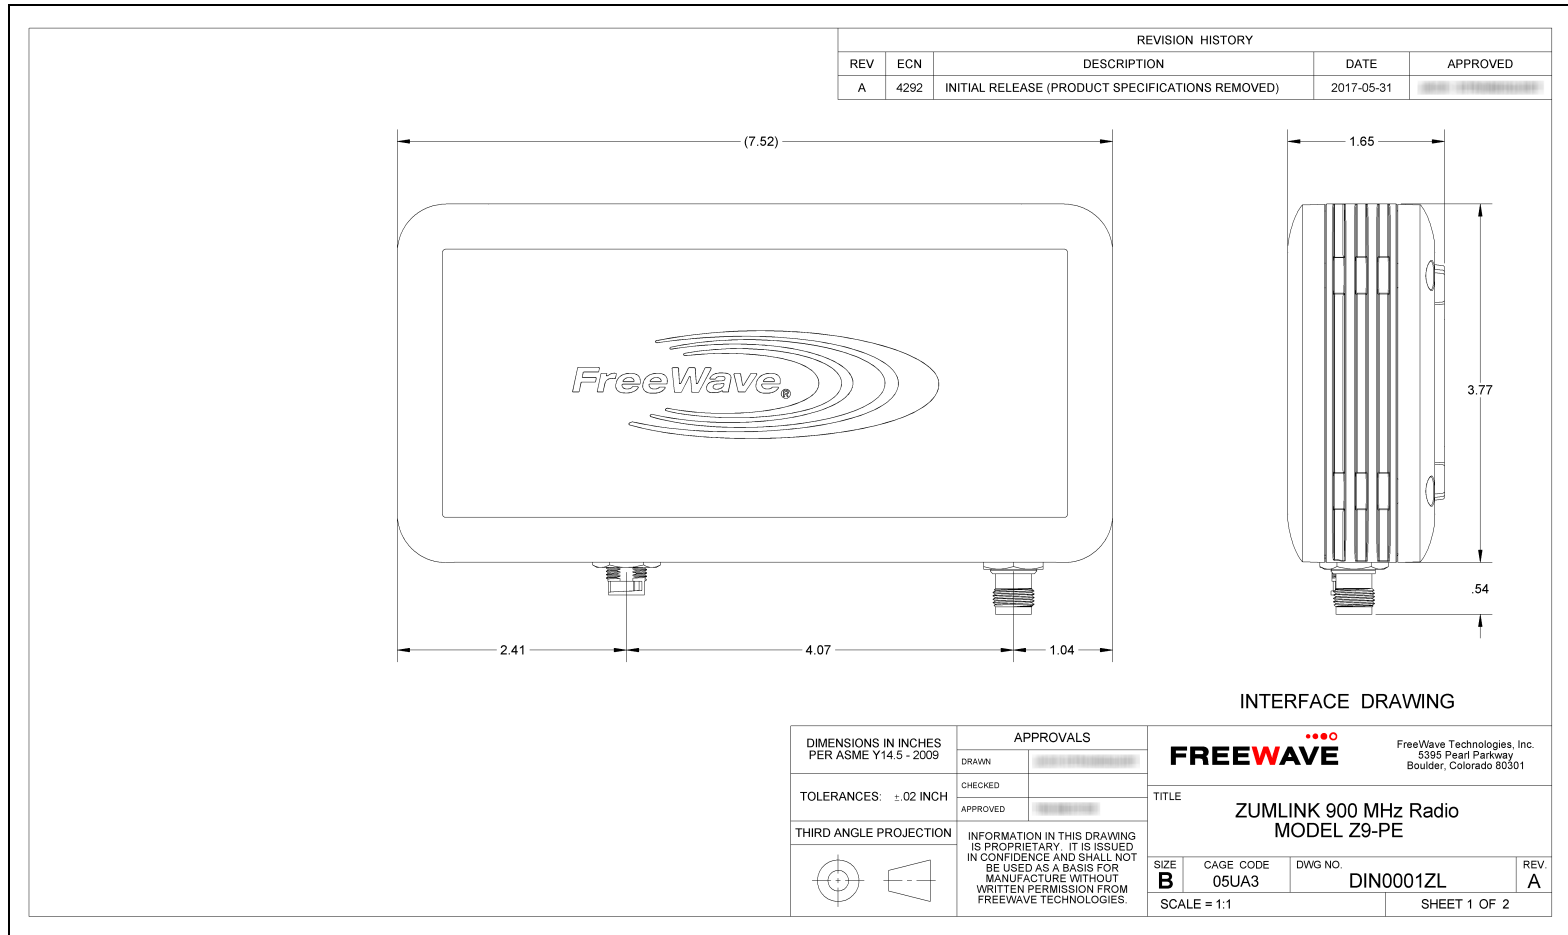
Z9-PE Mechanical Drawing - Top and Sides
